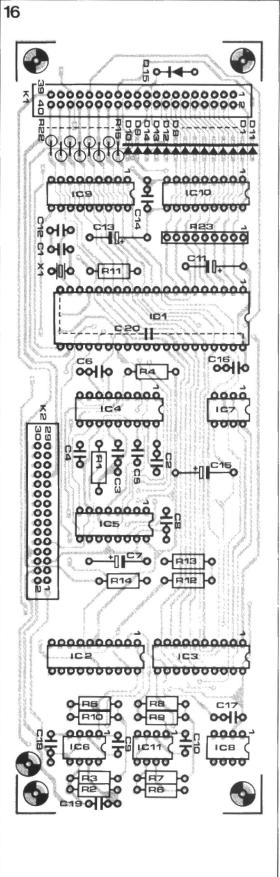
Component overlay of the double-sided, through-plated processor board.
